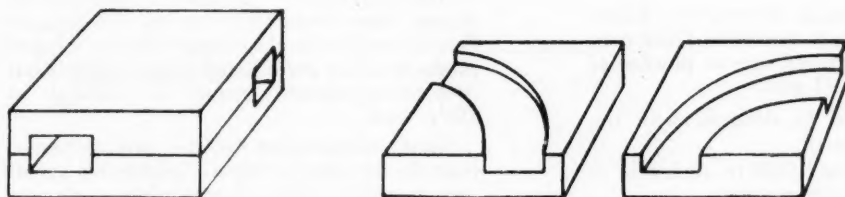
90°E plane bend fabricated with mirror-image parts machined from bar material.
